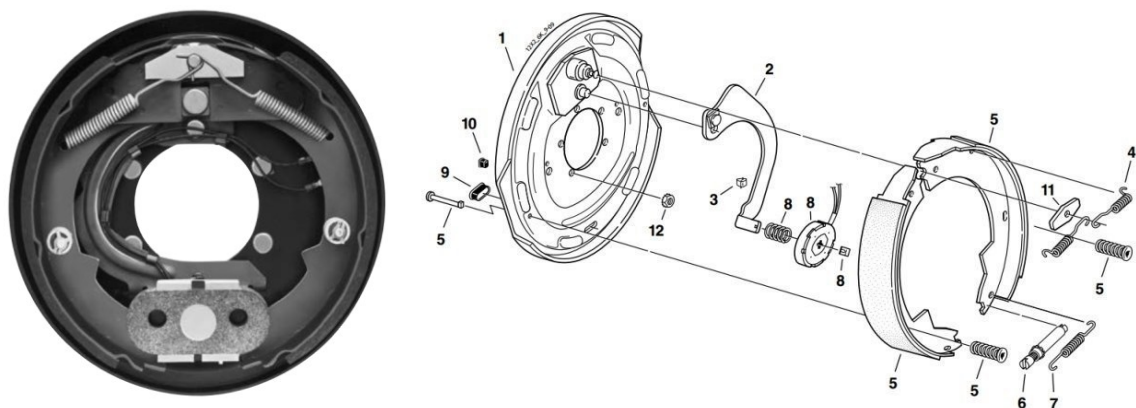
Electromagnetical Warner Brake concept (1: backplate, 2: actuation lever, 4: return springs, 5: brake shoes, 8: magnet assembly)³⁷
